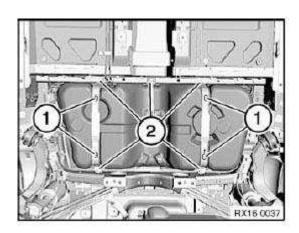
Expander Rivets And Fuel Tank Mounting Screw Courtesy of BMW OF NORTH AMERICA, INC.
